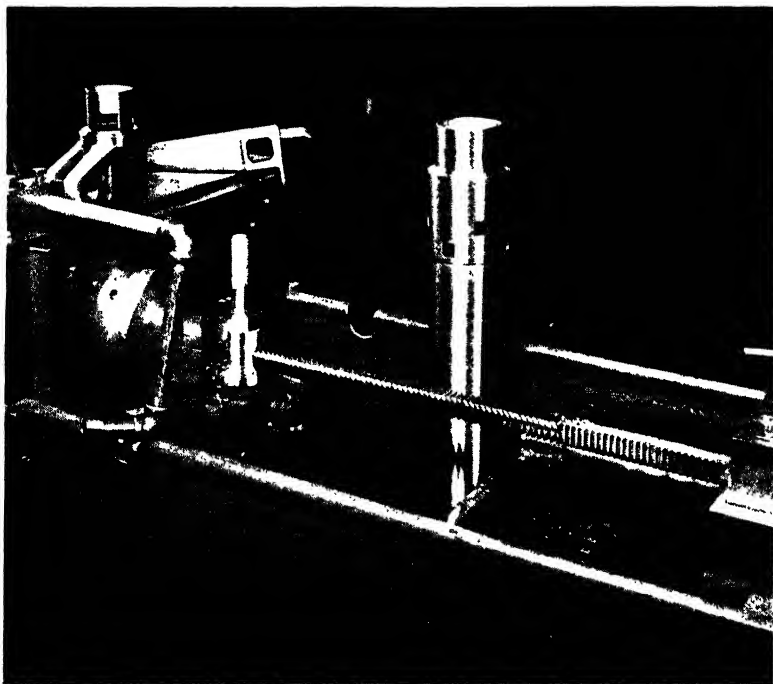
Broaching Equipment Employed for Cutting Square Openings within Close Tolerances in Several Landing Gear Parts
